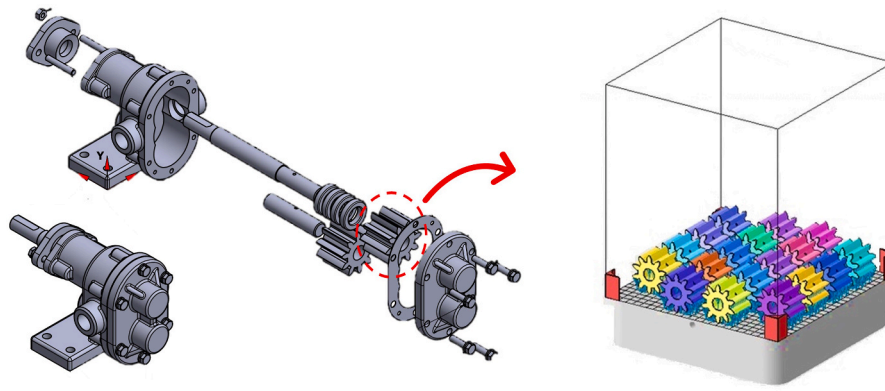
Assembly of the gear pump and build utilized for producing new gears.
